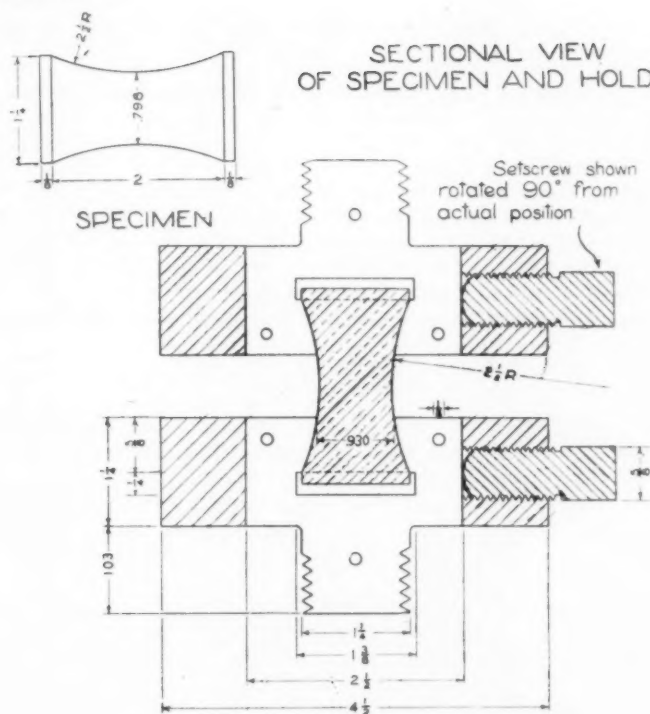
SECTIONAL VIEW OF SPECIMEN AND HOLDER.
